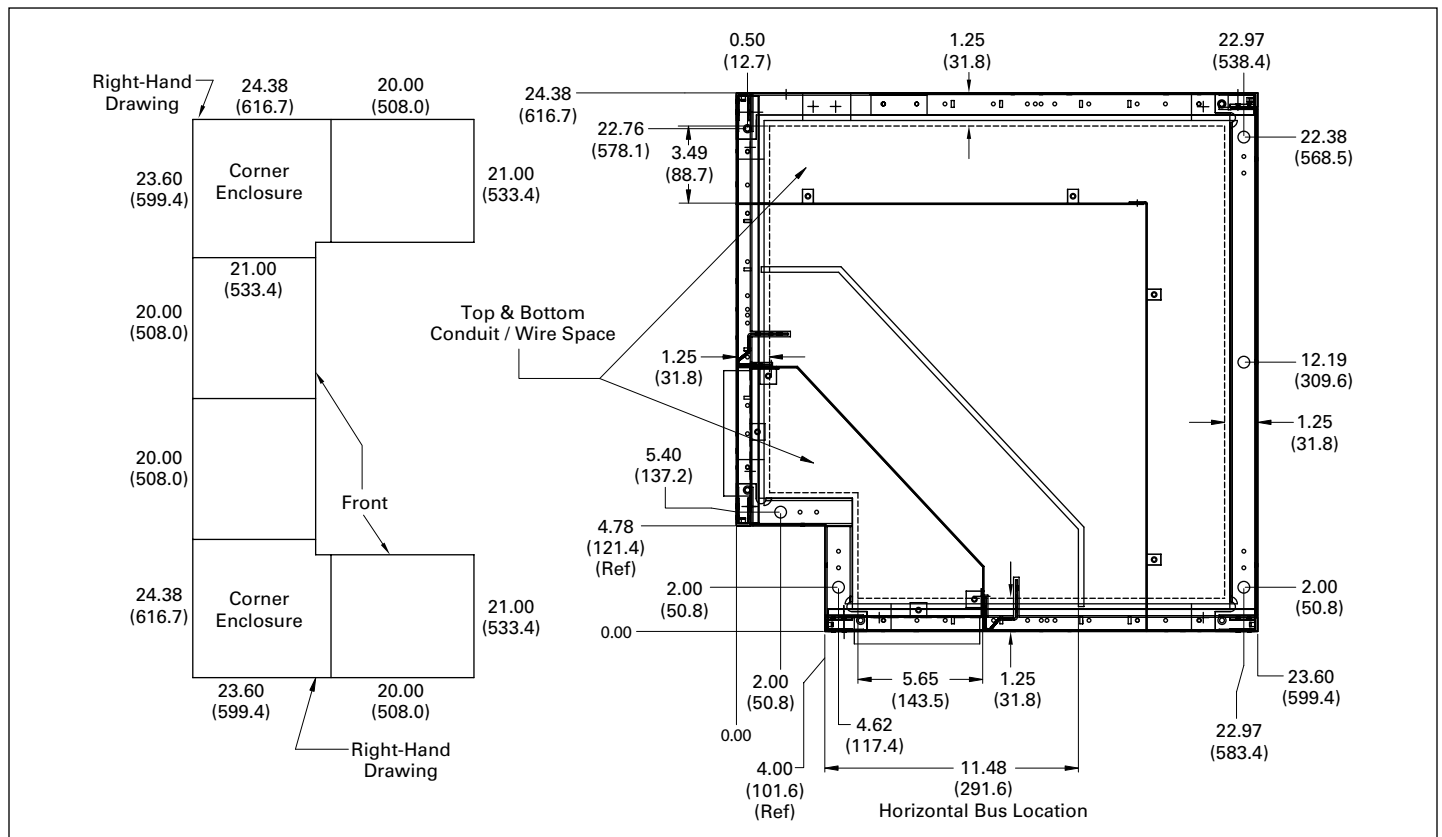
21.00-Inch (533.4 mm) Deep—Front- and Rear-Mounted Corner Structure
